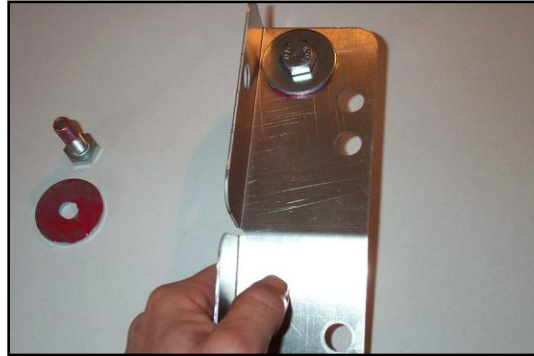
Insert one of the large greased bolts and washers through the hole of one of the side "wings" as shown here.
